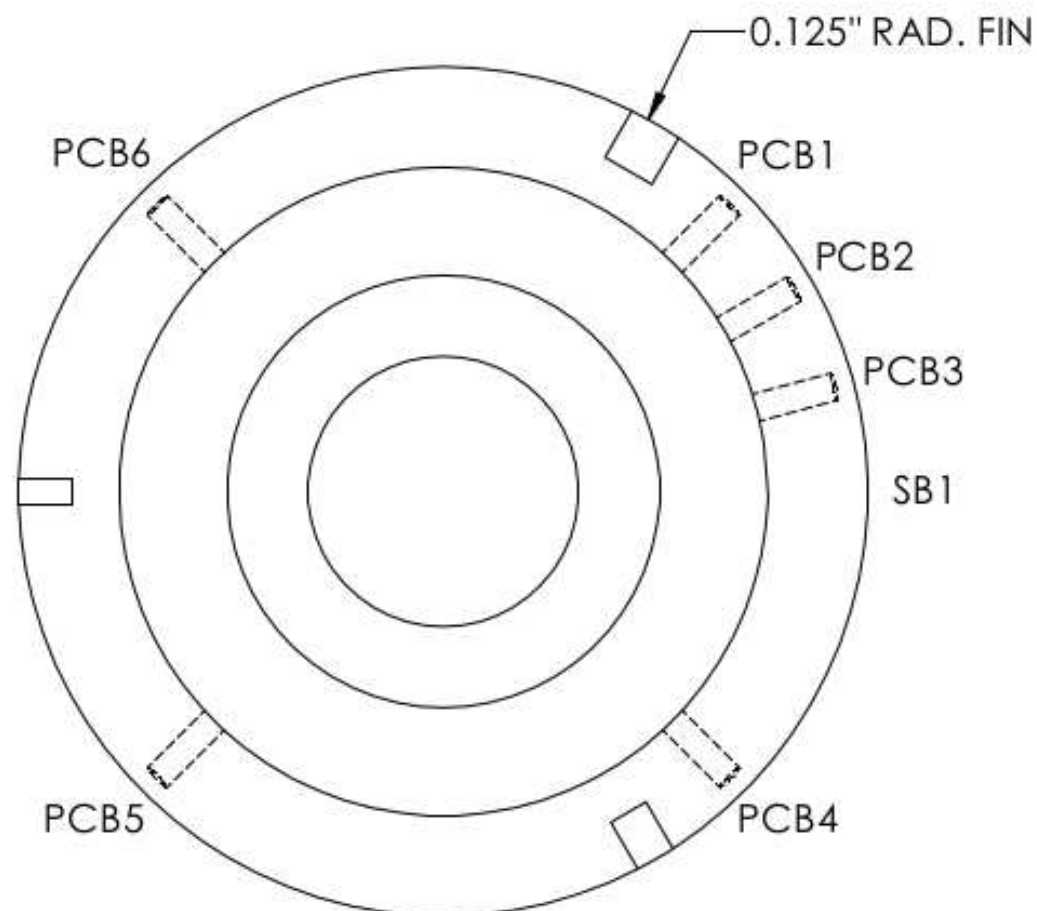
Entry 2 PCB and SB locations. View from back end of cone.
